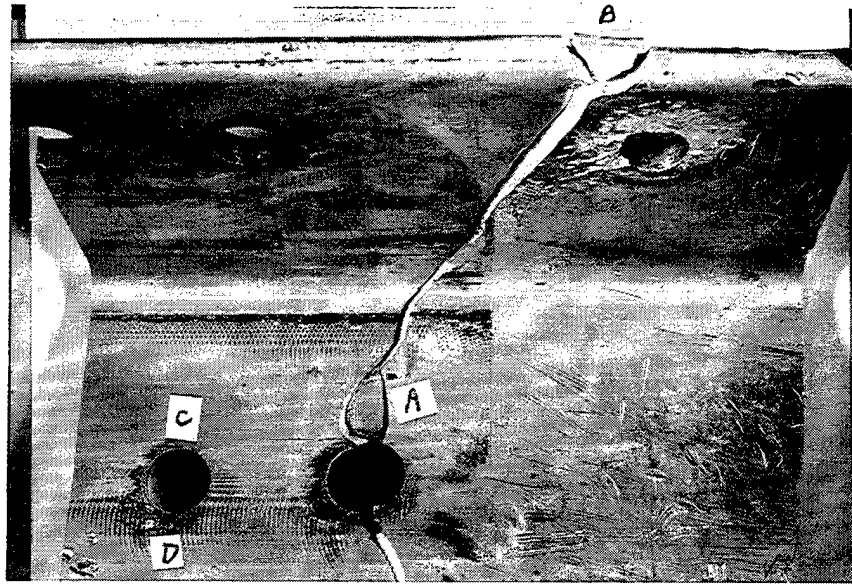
Top view of the broken angle section of the failed bottom chord on the female center panel assembly of the No. 2 Modified AVLB. The crack went across the countersunk rivet hole in the horizontal leg. Note the blackened areas at the edge of the holes in the horizontal leg and along the inside corner of the angle in addition to the outlines of the machined marks from the bottom of the forged center hinge in contact with the top surface of the angle. Two small pieces (A and B) probably broke off during the removal of the broken section. Two small cracks (C and D) were observed 180° apart in the edge of the second rivet hole in the horizontal leg. One-half actual size.
